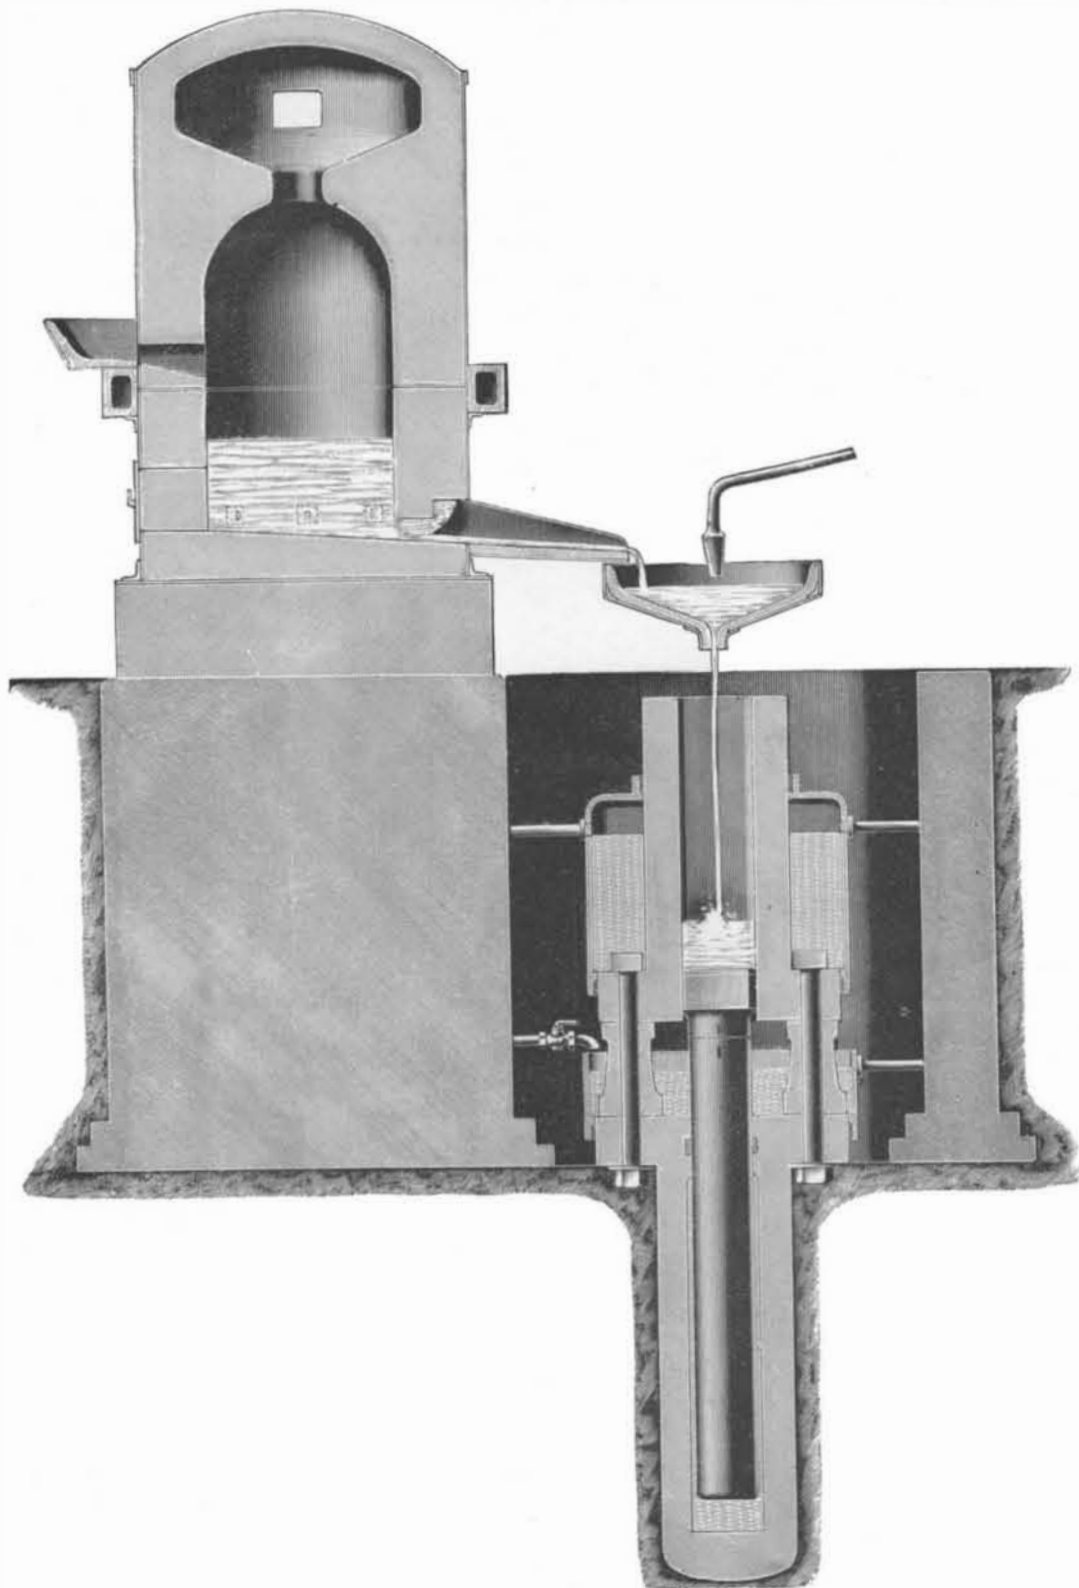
CONVERTER AND HYDRAULIC CASTING APPARATUS, 1856.
